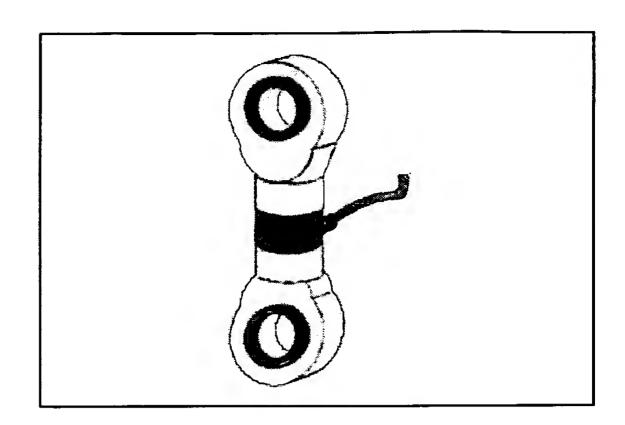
Model 11 or Model 31 mounting with rod end bearings
